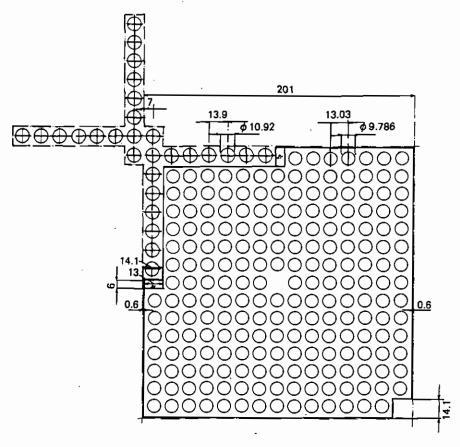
Horizontal cross-section of the Trino Vercellese reactor fuel assembly (All dimensions are given in mm)
